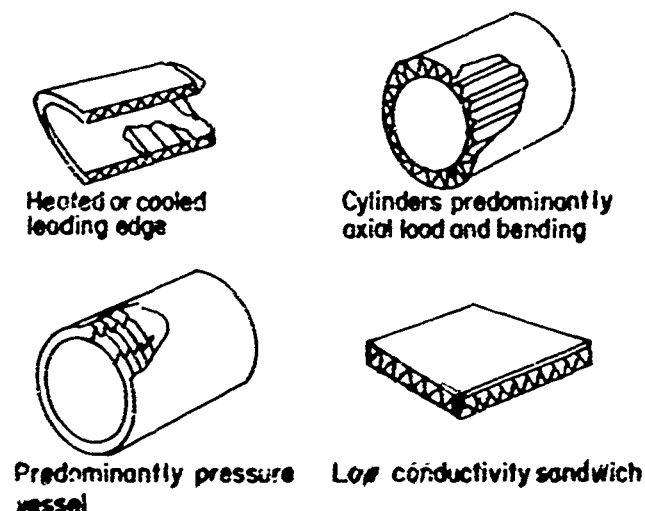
TYPICAL APPLICATIONS OF ROLL-WELDED CORRUGATED SANDWICH CONSTRUCTION (REF. 119)
